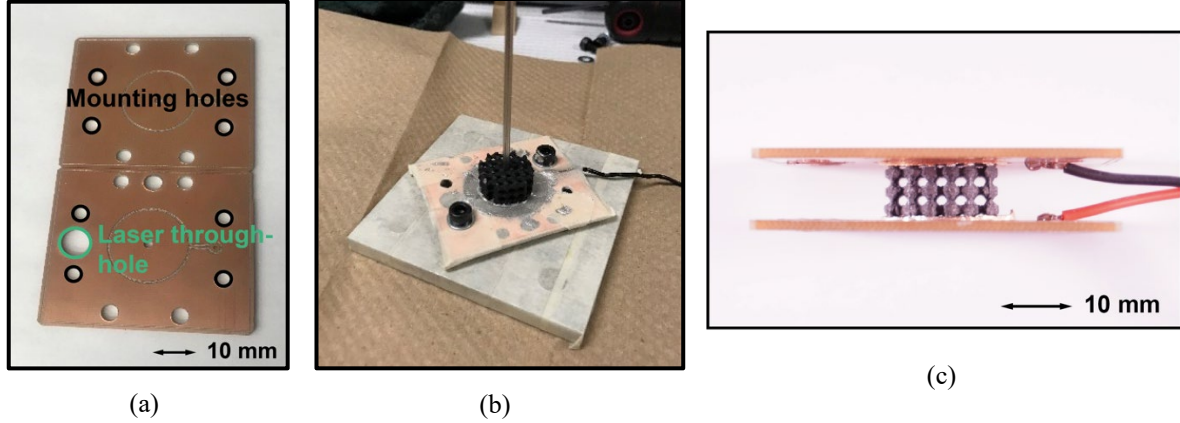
Additional fabrication images and steps during sensor electrode mounting. (a) Copper PCB Plates used to mount the sensor, which include mounting holes around the perimeter and a through-hole for the vibrometer laser path. (b) PCB after being coated with silver epoxy and attaching the sensor. The vertical shaft is used to orient the sensor squarely to the PCB. (c) Sensor mounted to both PCBs.
